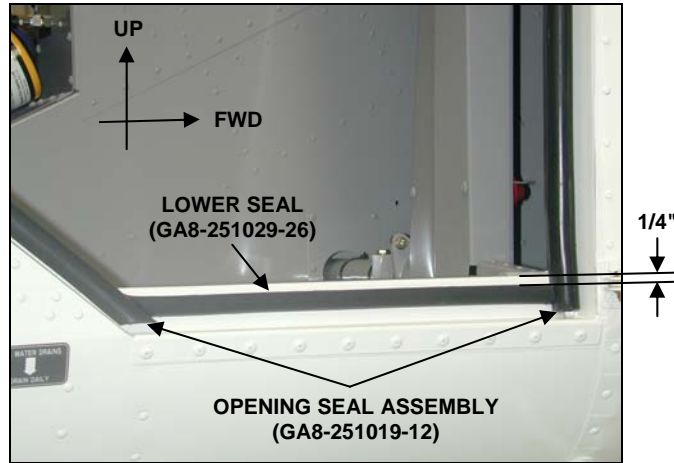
New seals installed in the lower section of the door opening (right hand side shown).
